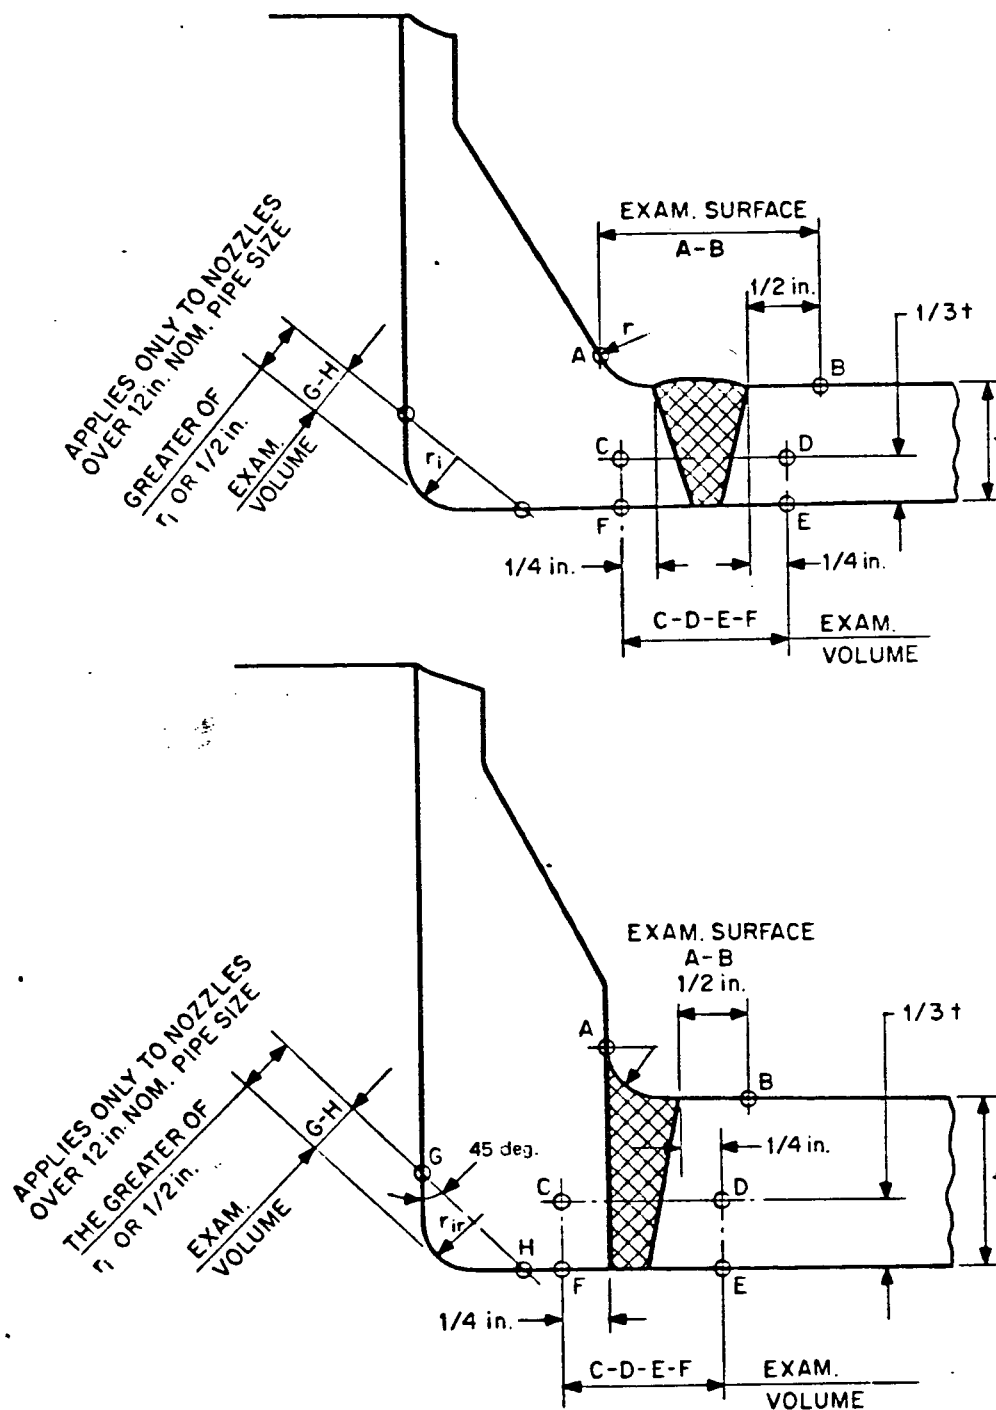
NOZZLE-TO-VESSEL WELDS
